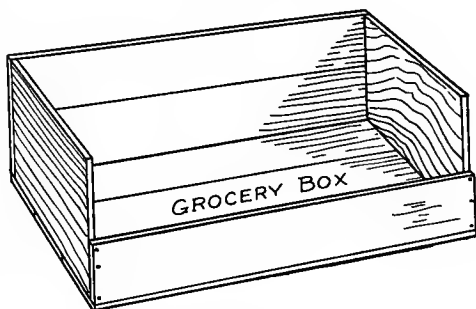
Box with the Side Board Removed for Drop-Leaf.
